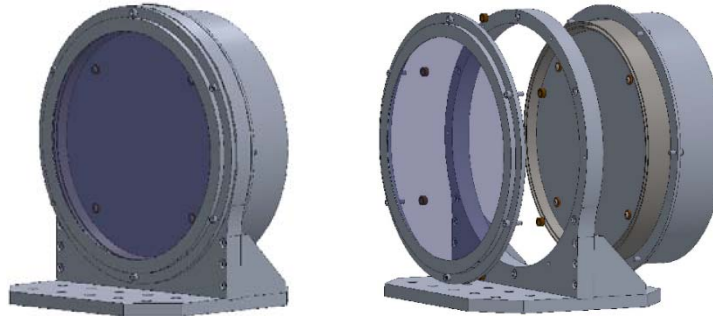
Left: USPS-MA with 150-mm-diameter assembly. Right: Exploded view for clarity of assembly.
